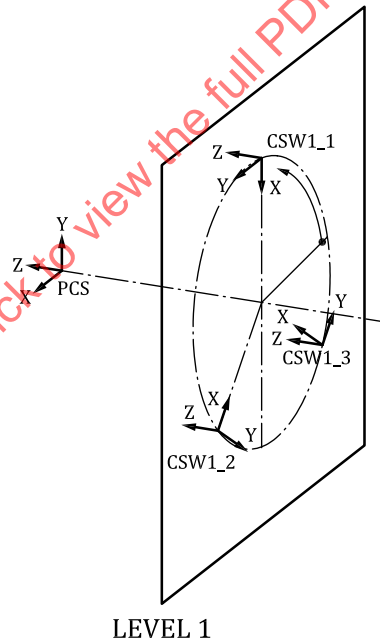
Adjustment of coordinate system at workpiece side — Angular order on a circle
